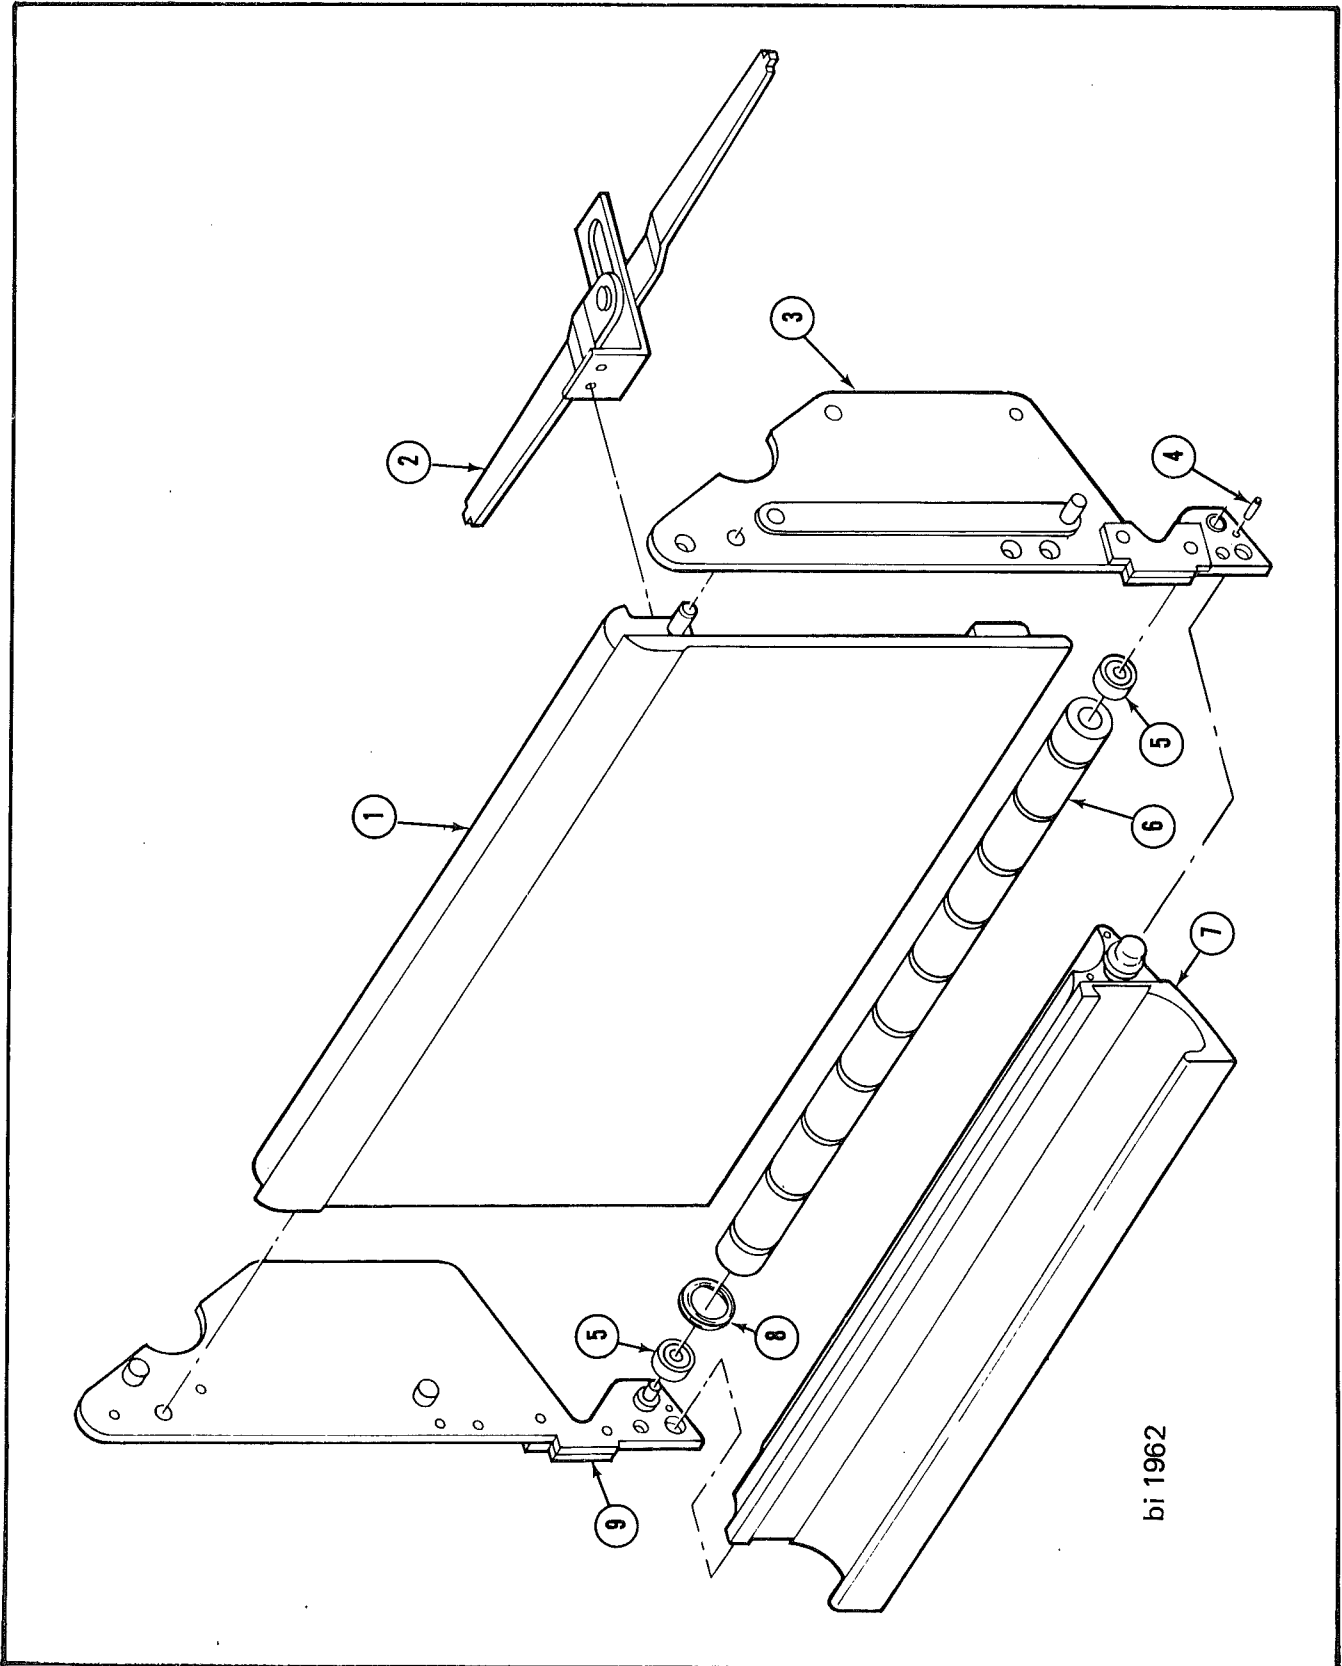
TABLE ASSEMBLY, WRITING
